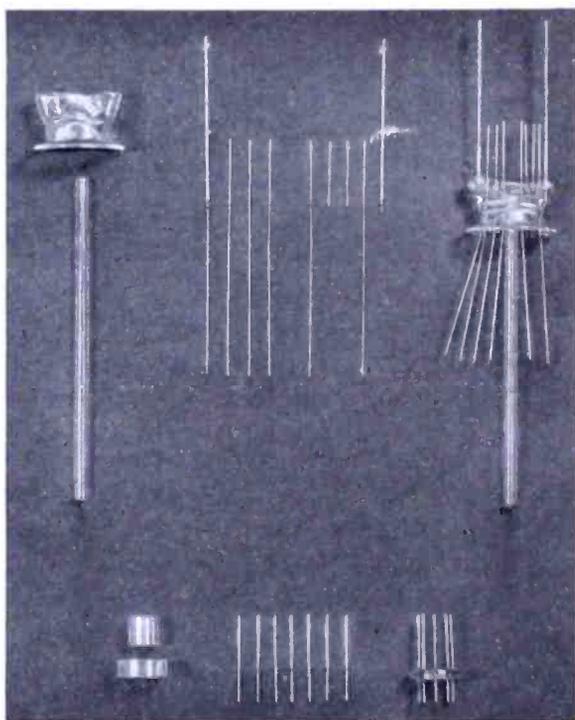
(Top)—Parts and an assembled unit of a conventional stem.
